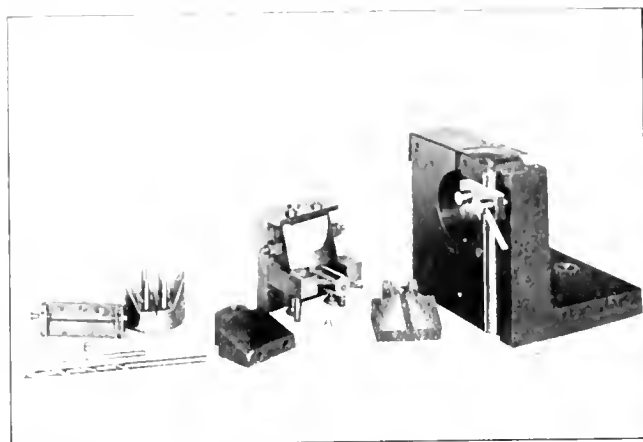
Two Jigs and a Fixture used in the Construction of the Block
